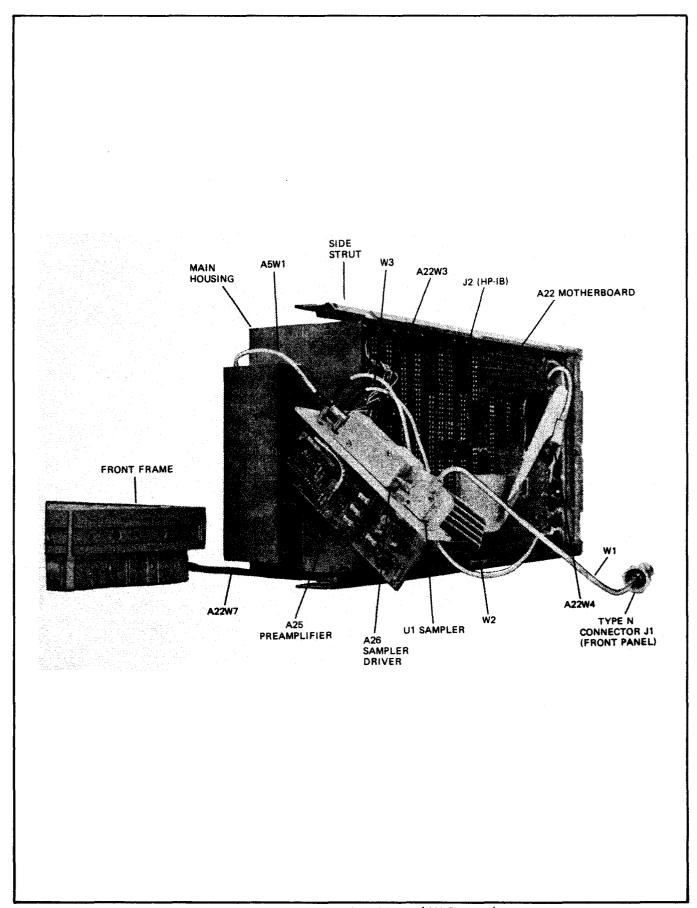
Front Frame, A25, A26, and U1 Removal
